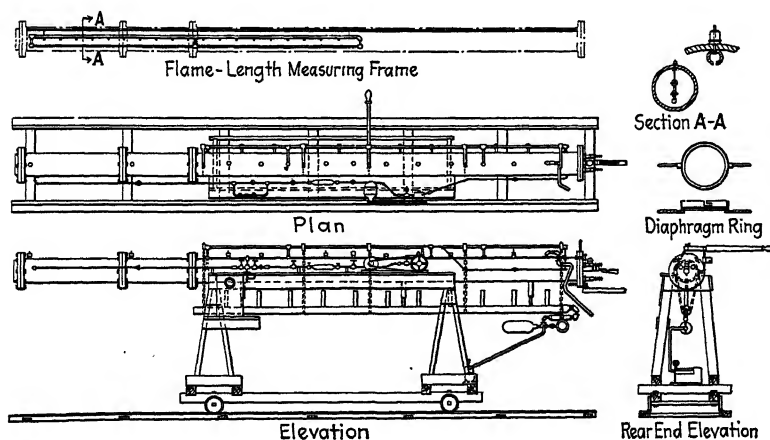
ASSEMBLY AND DETAILS OF THE LABORATORY STEEL DUST GALLERY.
